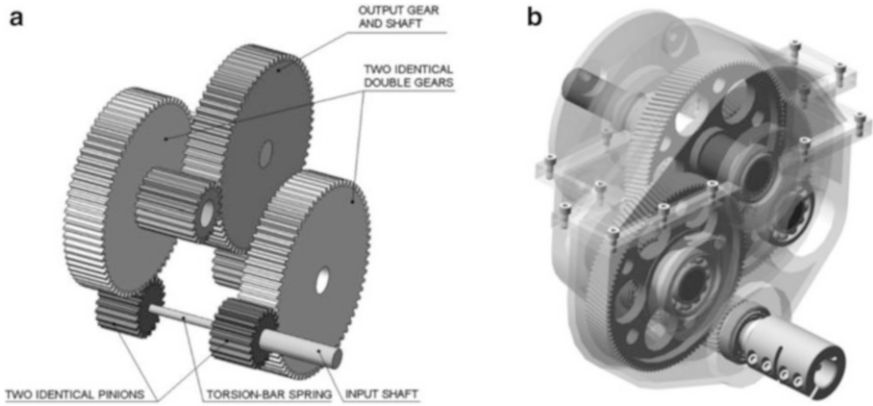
(a) Anti-backlash gear assembly, (b) prototype design of the backlash-free gearbox
